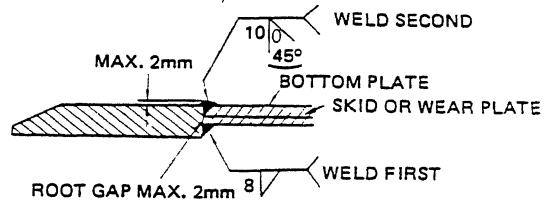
Weld Build-up on Cutting Edge and Skid
